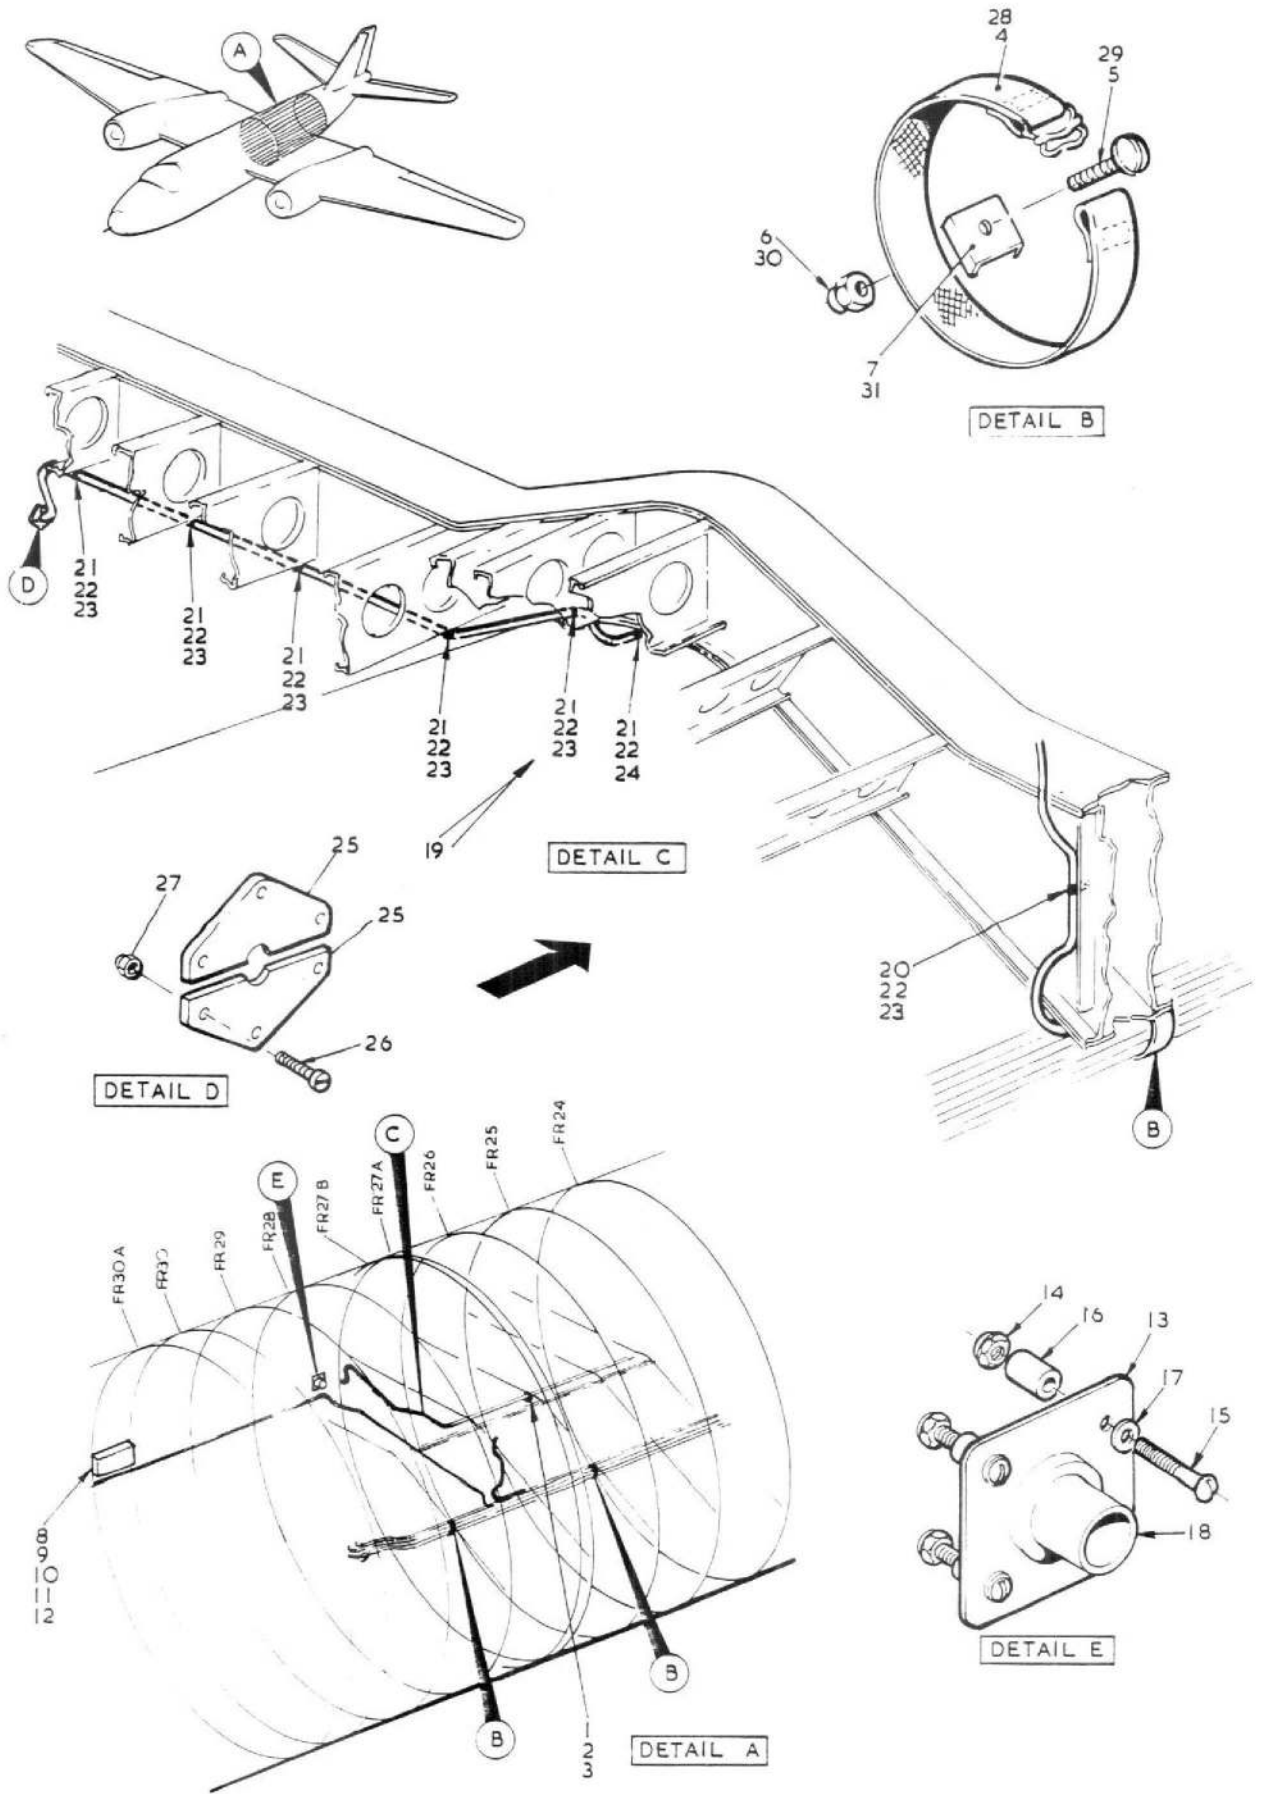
ELECTRICAL EQUIPMENT IN CENTRE FUSELAGE
